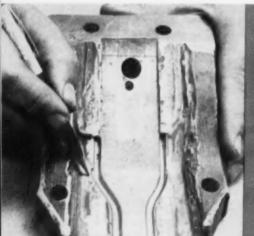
After forming more than 2,500 pieces of 0.020-inch stainless steel, sharp edges begin to show excessive wear. However, the die is easily repaired for further use.
